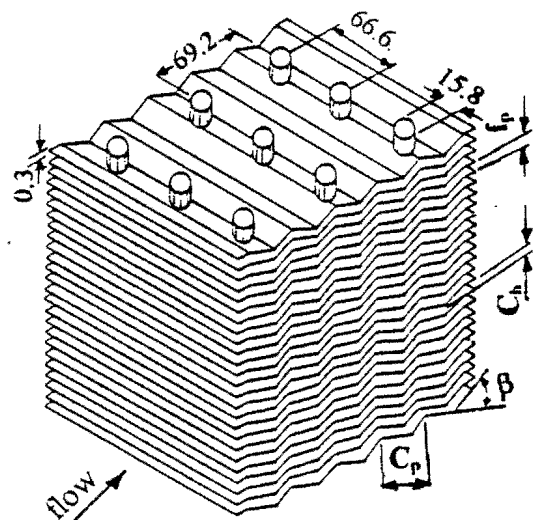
Isometric of corrugated fin-and-tube heat exchanger.
